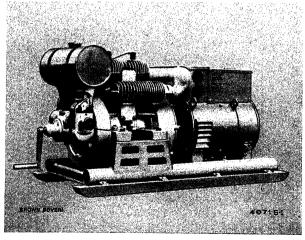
Portable welding set with petrol-engine drive. Weight 200 kg, welding current range 10-180 A.
